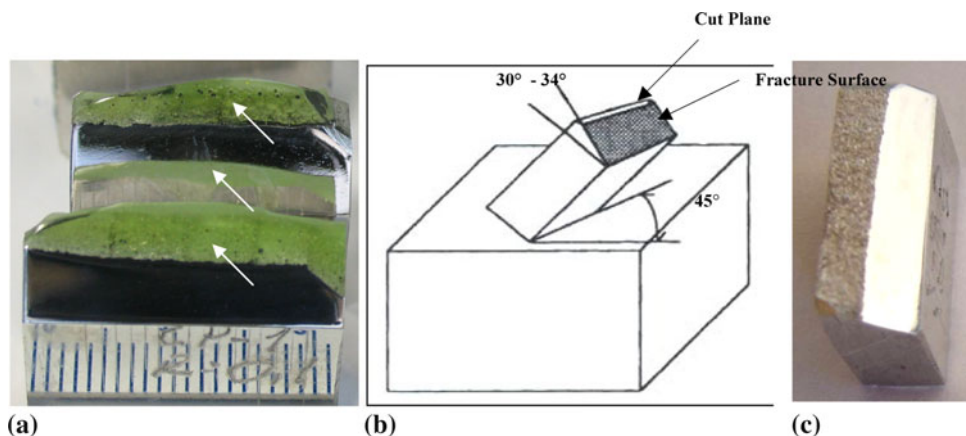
(a) Test specimens with the fracture surface protected by resin Technovit 5071, showed by arrows, (b) schematic showing the cutting plane and fracture surface, (c) fracture surface after resin removed
